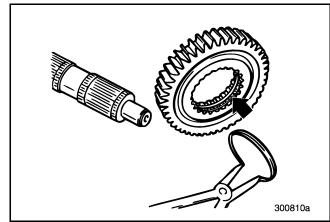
Removing First Speed Gear Snap Ring (T313L/T318L Shown)
